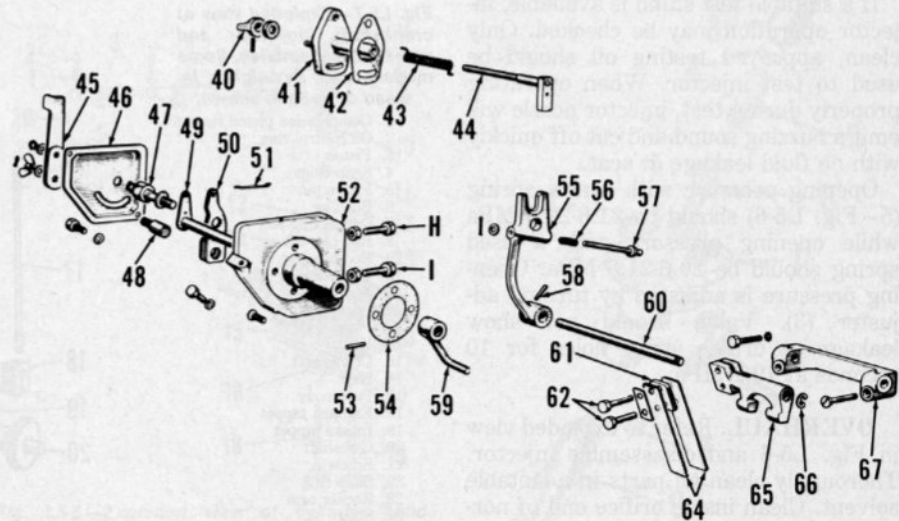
Exploded view of governor and control linkage. Governor fork (65) contacts governor cup (31—Fig. L5-7).
